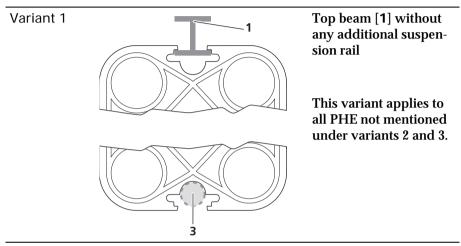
b - Variant 1: Top beam (1) without any additional suspension rail
